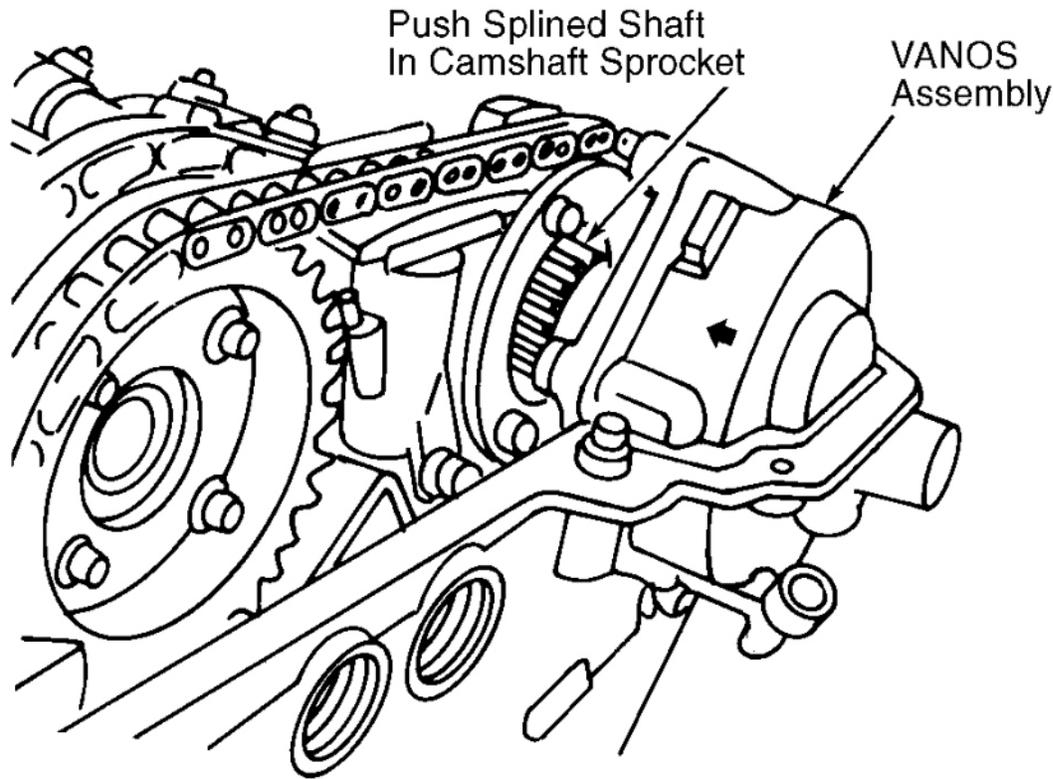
Engage Splined Shaft Into Camshaft Sprocket
